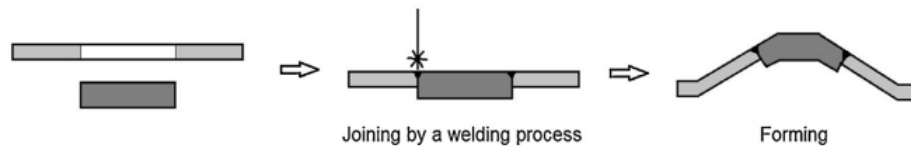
Principle of tailor welded blanks [18].
